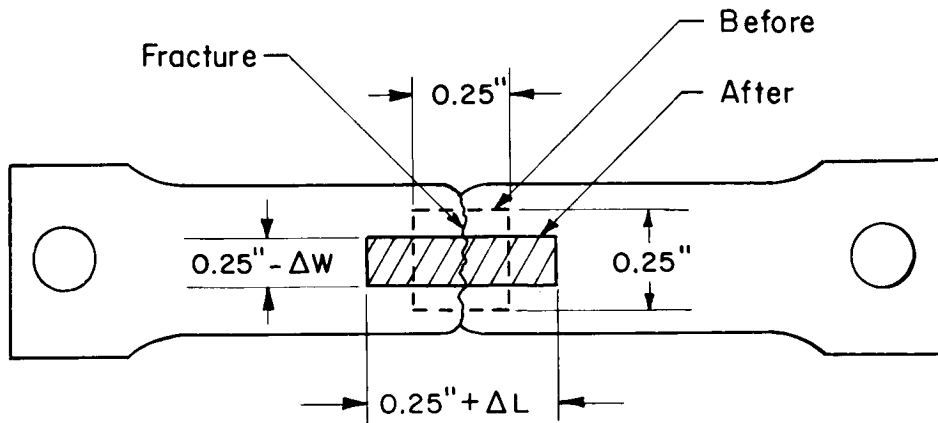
TYPICAL GRIDDED TENSION SPECIMEN (REF. 53)
